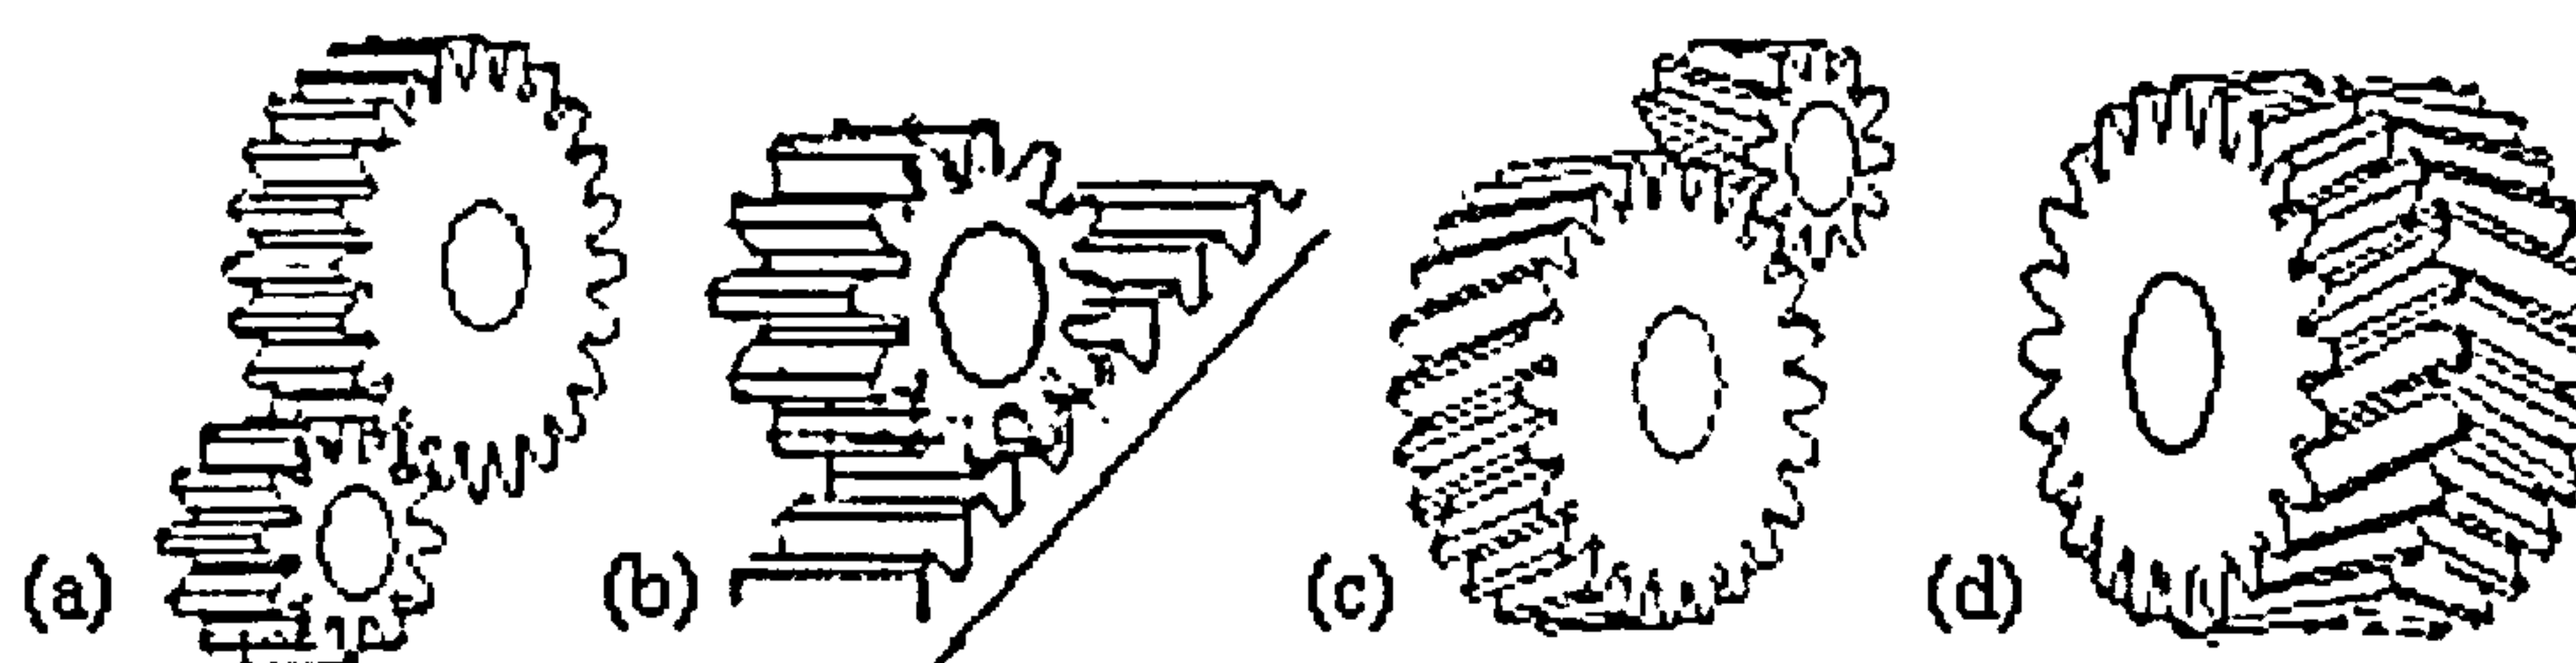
Gears with parallel axes: (a) spur gears, (b) rack and pinion, (c) helical gears and, (d) double-helical gears.
